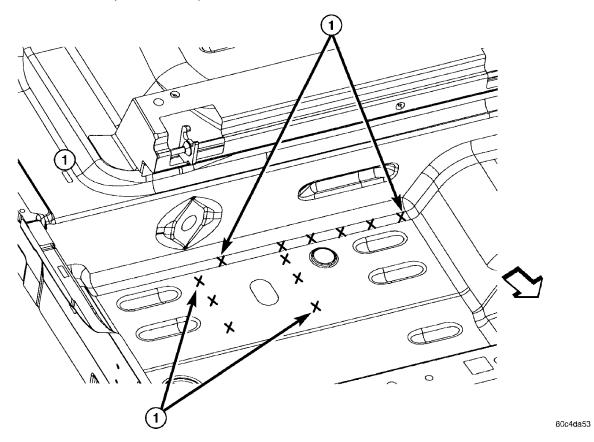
REAR FLOOR PAN TO REAR FLOOR PAN FRONT KICK UP CROSSMEMBER AND FRONT SIDE RAIL REAR EXTENSION
